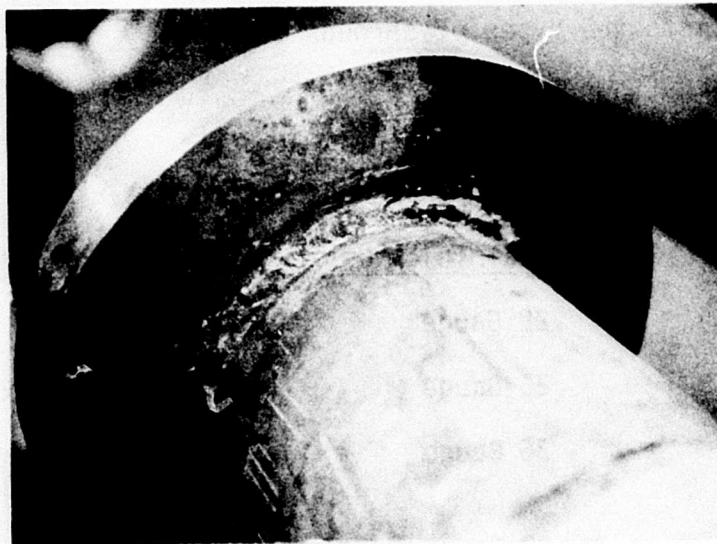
Cable-gripper box disc welded to 4-in. conduit.
